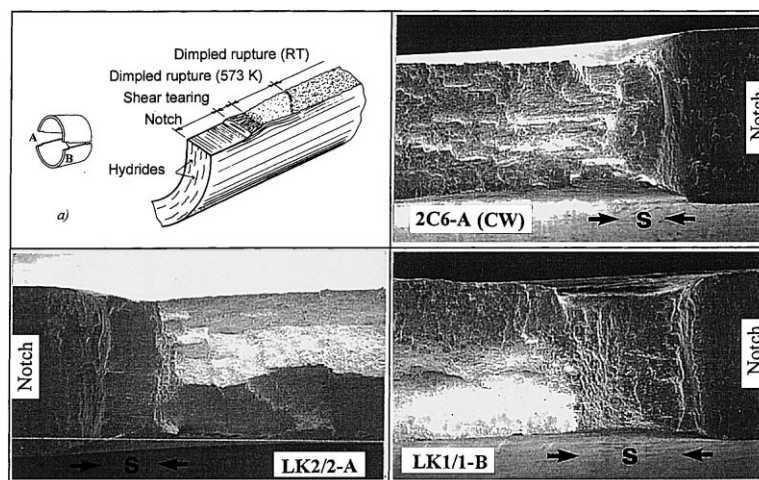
(a) Typical macrotopography of Zircaloy cladding specimens after the PL tension test and (b–d) the fracture surface at the notch tip in unirradiated (2C6) and irradiated (LK1, LK2) Zircaloy-2 specimens. The area of in-plane shear fracture (shear tearing) is designated as S. For specimen designations see Ref. [7].
